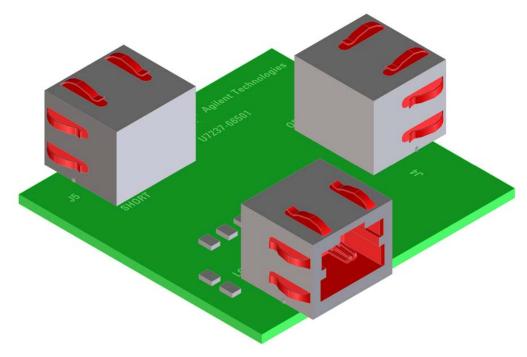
Section 3 of the U7237A 10GBASE-T Transmitter Test Fixture
